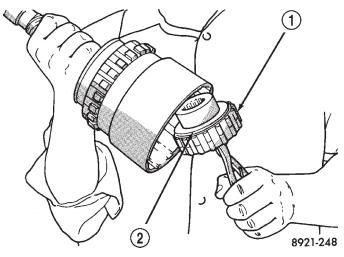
Overrunning Clutch Assembly Removal/ Installation
